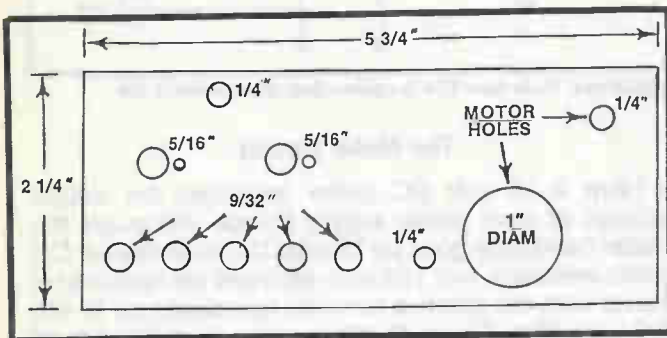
Follow the front panel hole layout to determine where each front panel component is located and what size hole to drill.
